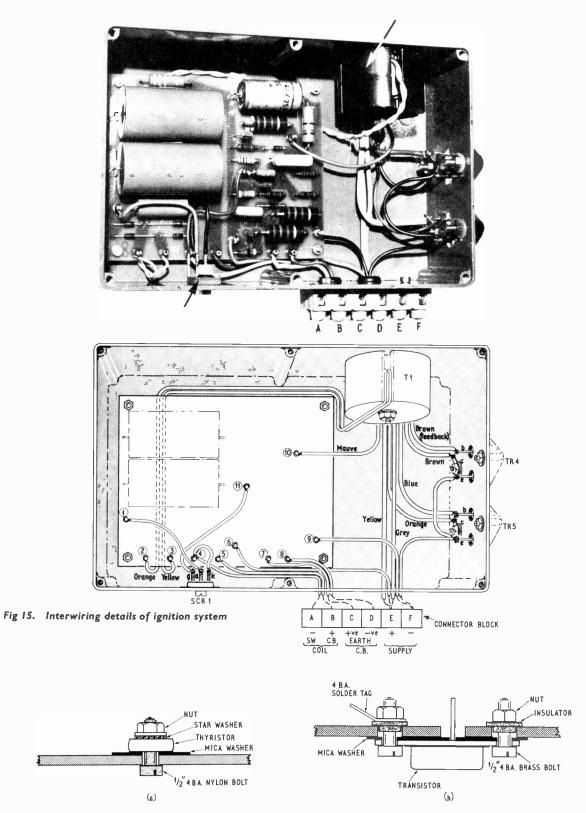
(a) Mounting details for thyristor. (b) mounting details for inverter transistors
